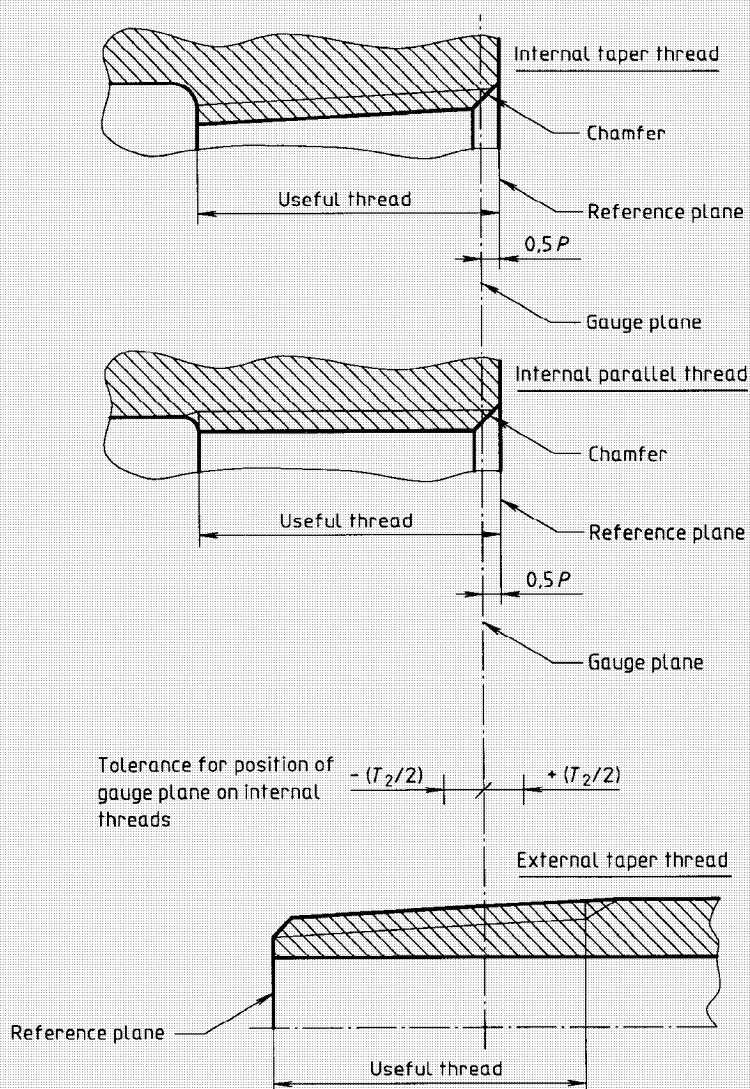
Illustration of internal and external pipe threads (position of gauge plane, reference plane useful thread)
